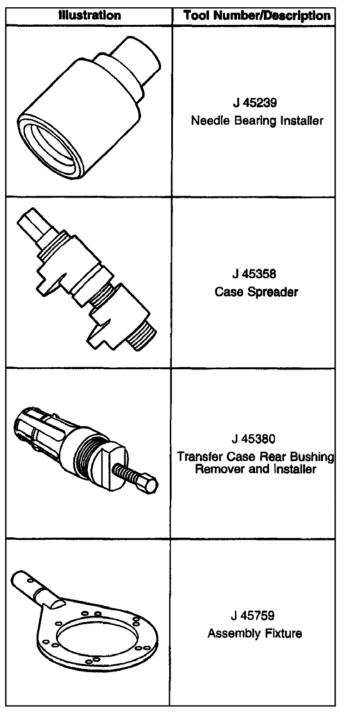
Identifying Special Tools & Equipment (2 Of 4)
